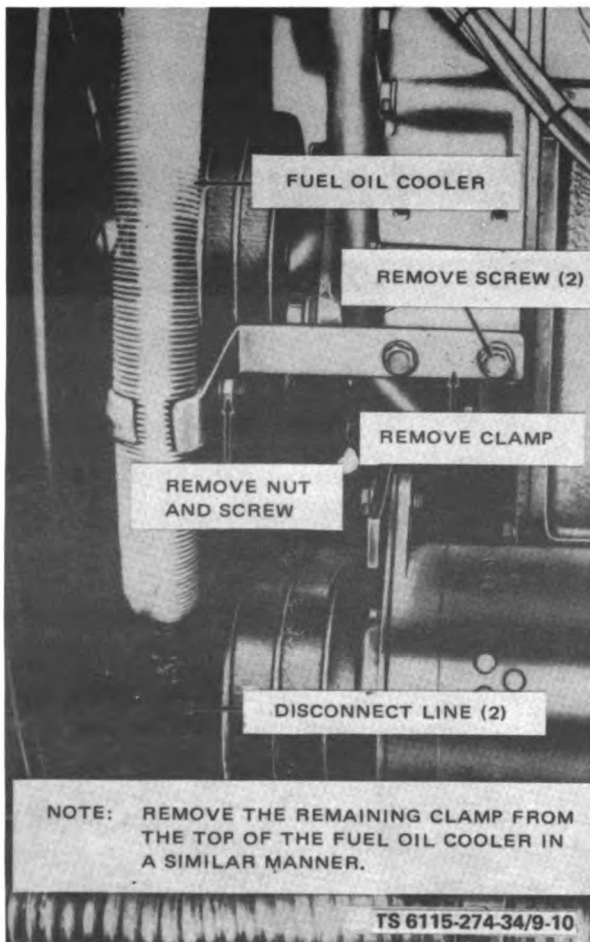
Fuel Oil Cooler, Removal and Installation
